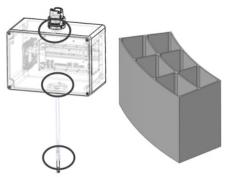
Sensor system with marked misalignments (left) and demonstrator workpiece with deep cavities (right)
